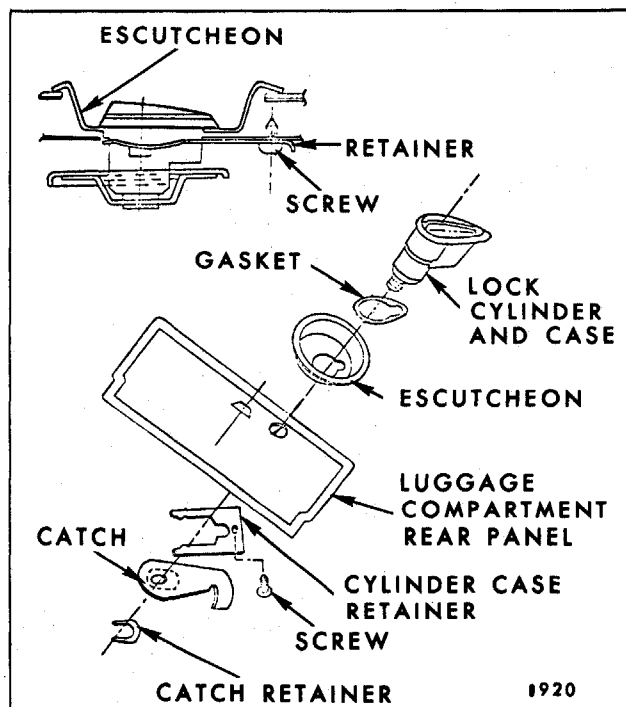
Luggage Compartment Lock - "A" Body Styles
